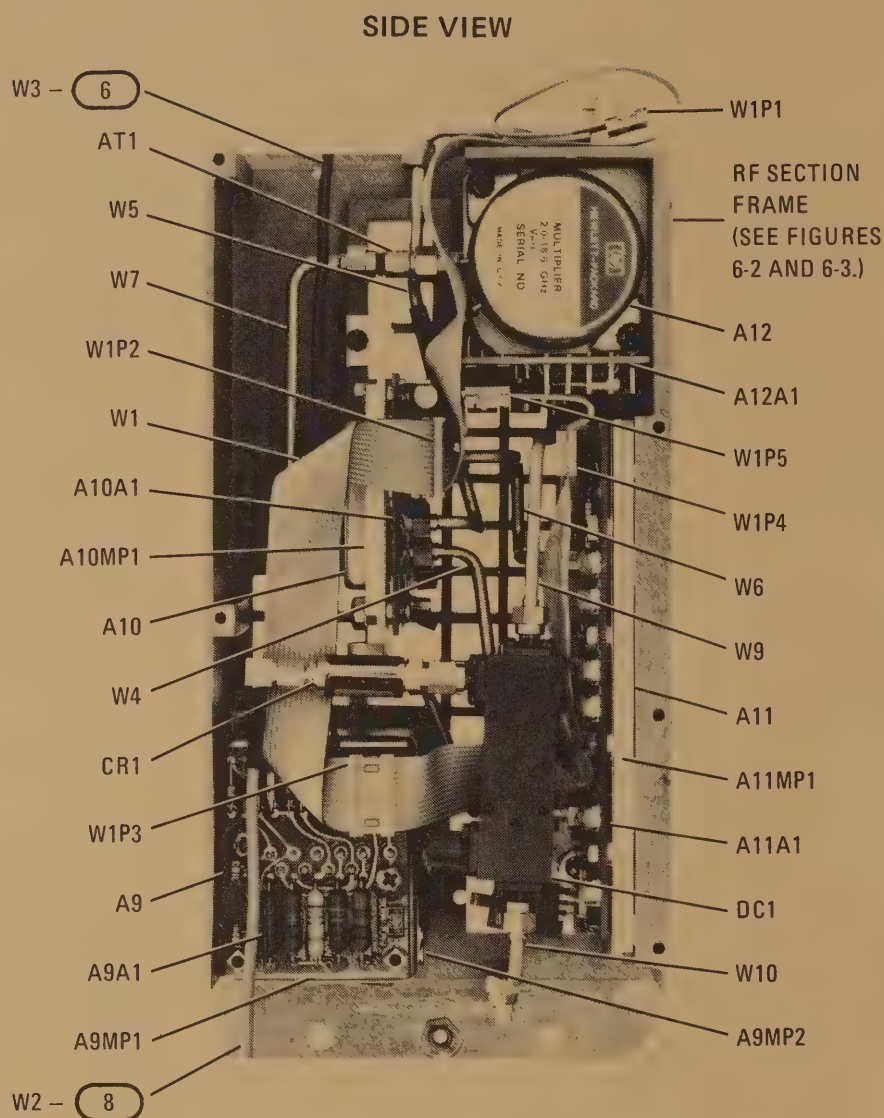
RF Section, Major Assembly and Component Locations (1 of 2)
